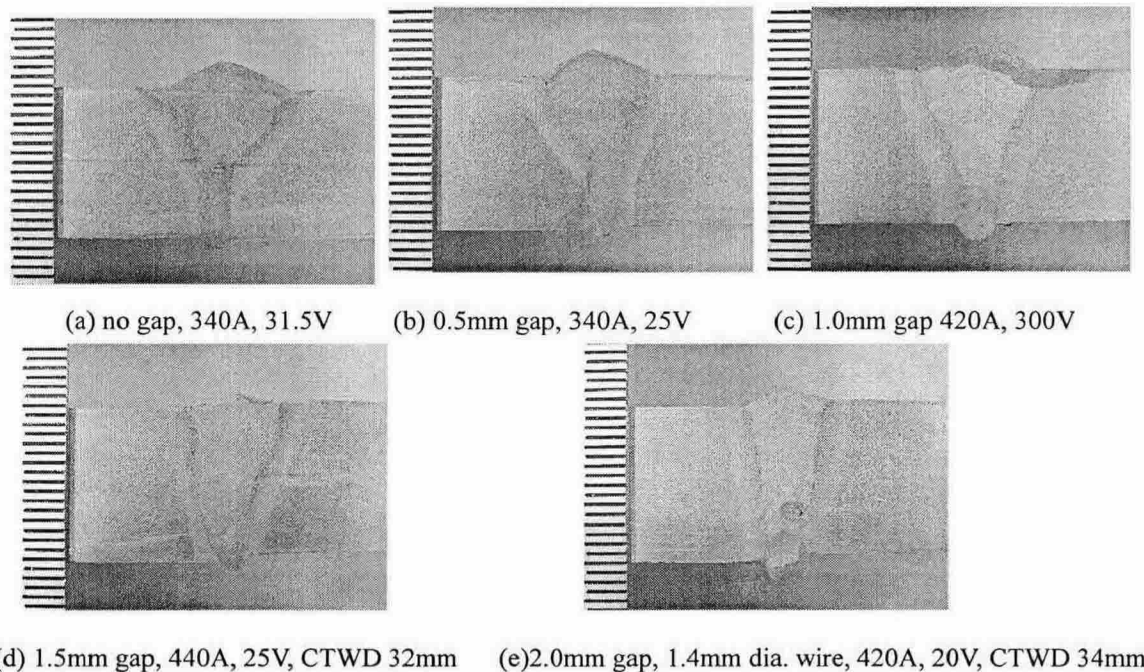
Bead cross-sections for butt welding with variable joint gap up to 2mm
